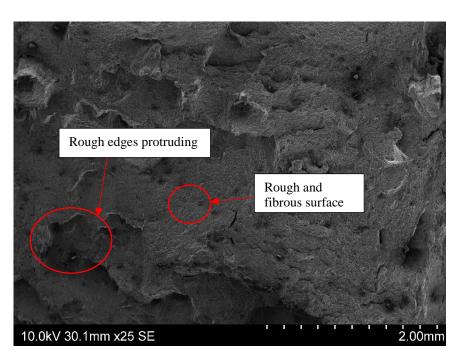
Fracture surface of aluminium specimen at 25X magnification
